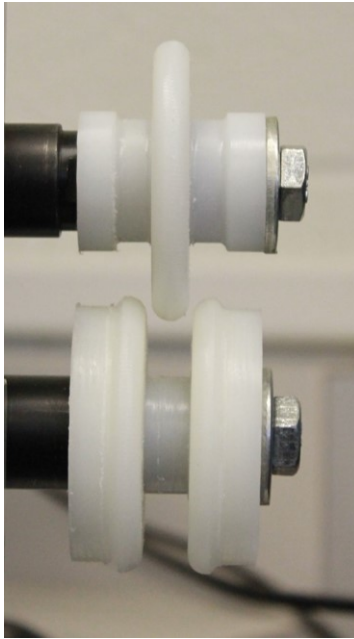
Three-Point Bending Achieves the V-Shaped Cross Section
